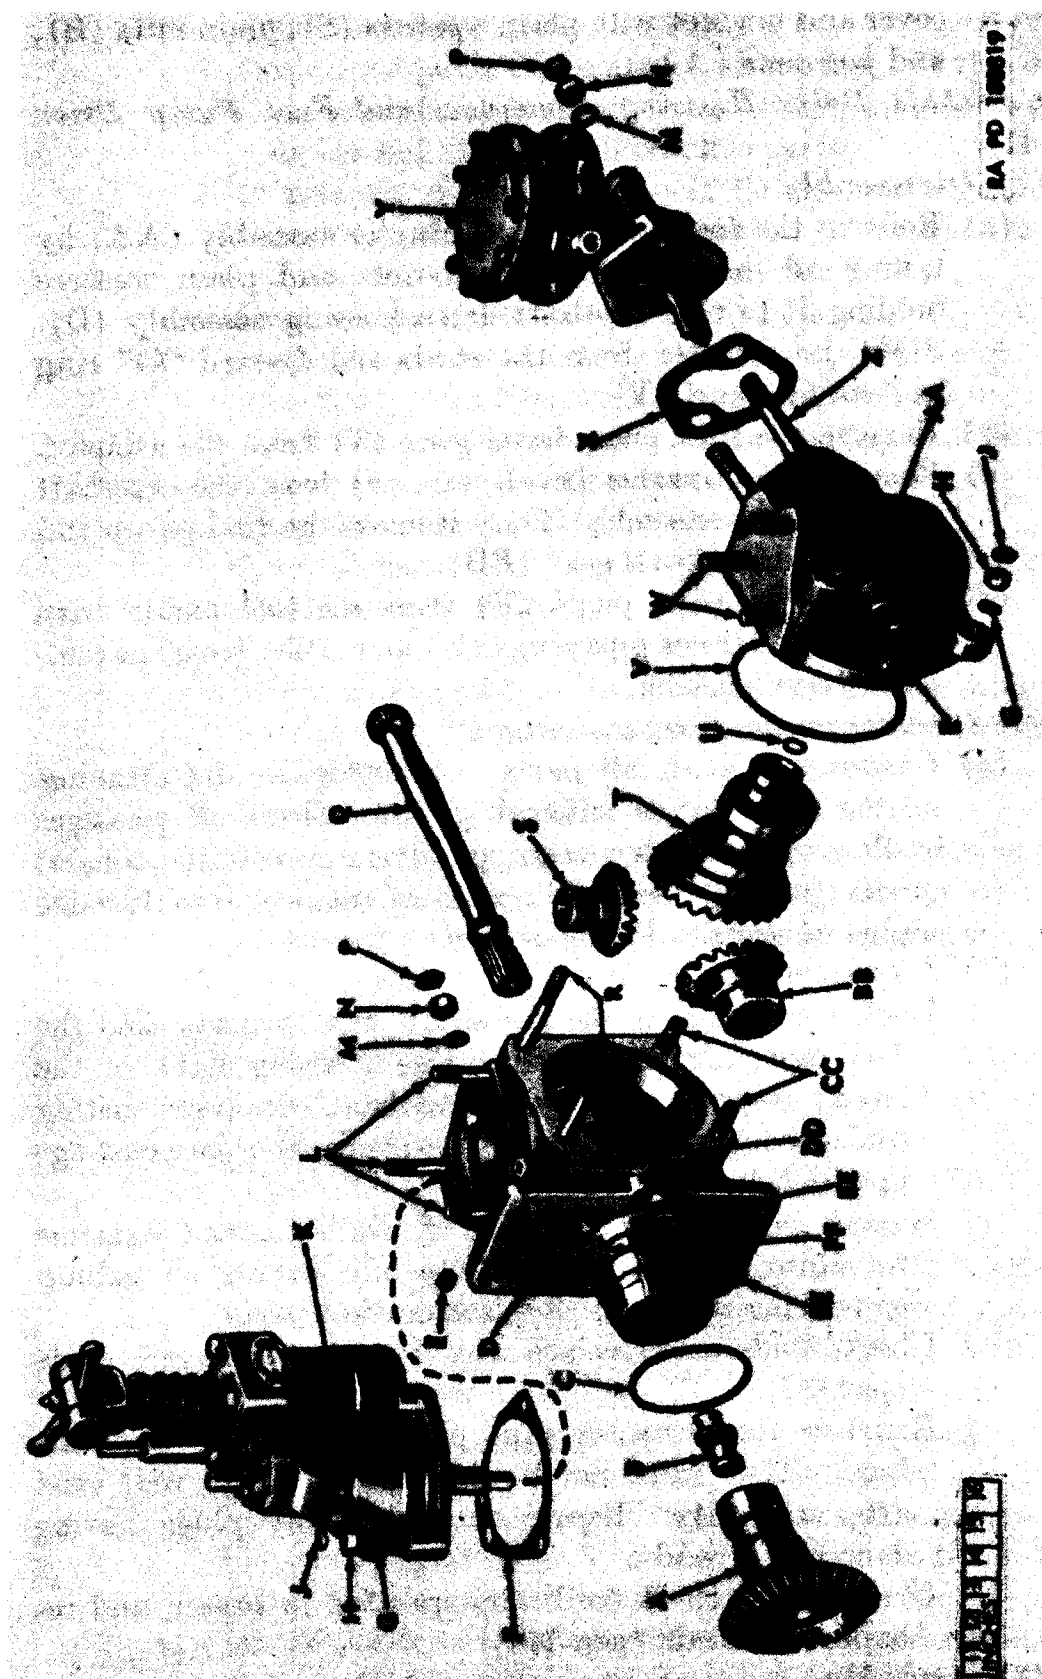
Camshaft drive housing—governor and fuel pump drive—exploded view.
